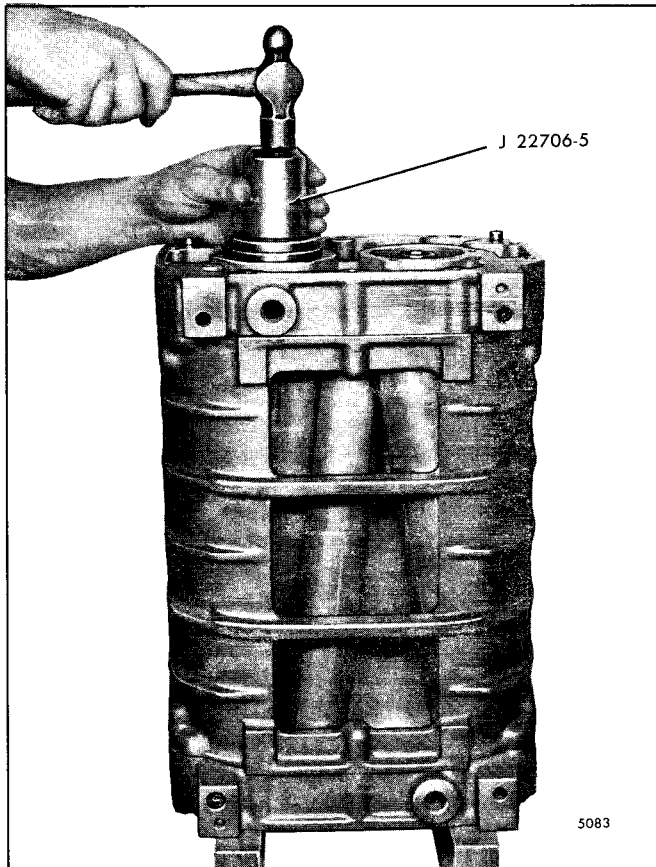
Installing Roller Bearings on Rotor Shafts and in Front End Plates using Tool J 22706-5
